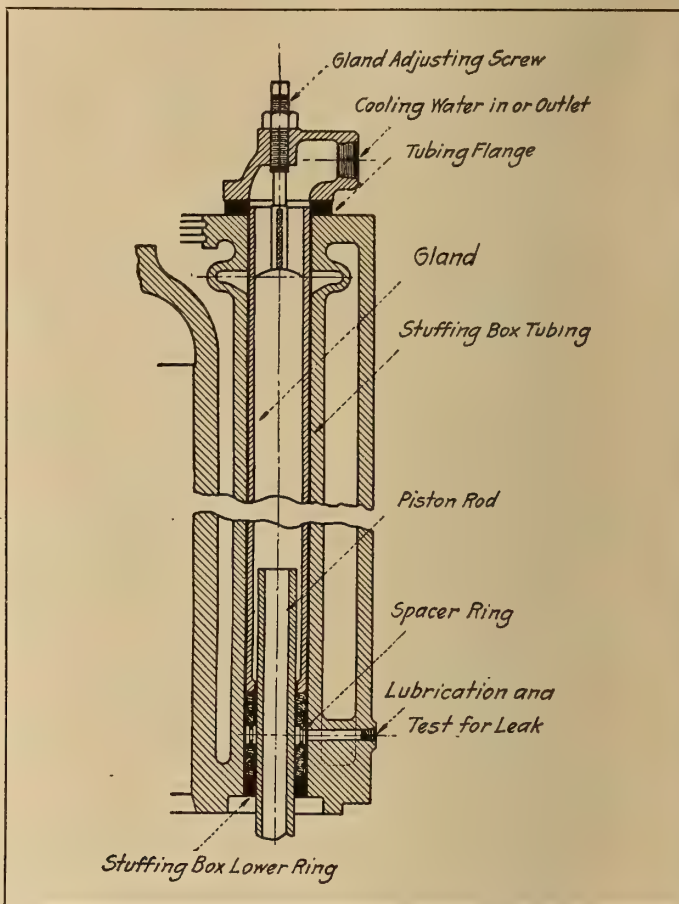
A LARGE SECTION OF STUFFING BOX FOR PISTON-COOLING ARRANGEMENT, MANNING, MAXWELL & MOORE MARINE DIESEL ENGINE
